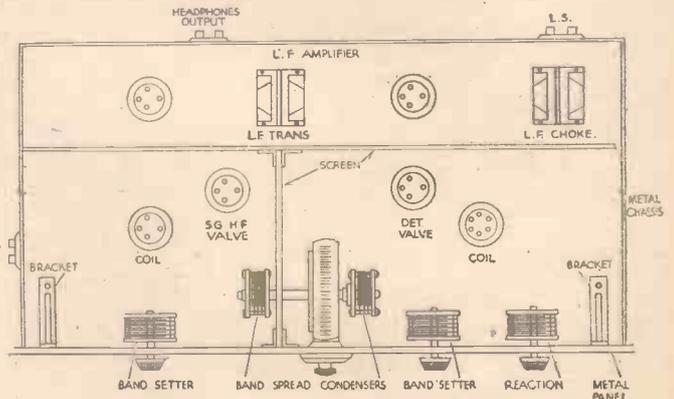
A simple form of chassis assembly with inter-stage screening.
